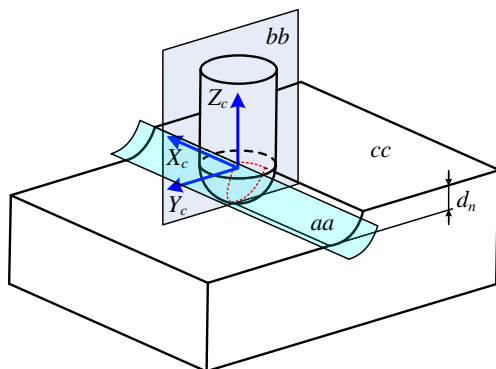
Three-axis down milling of horizontal plane with ball end mill
